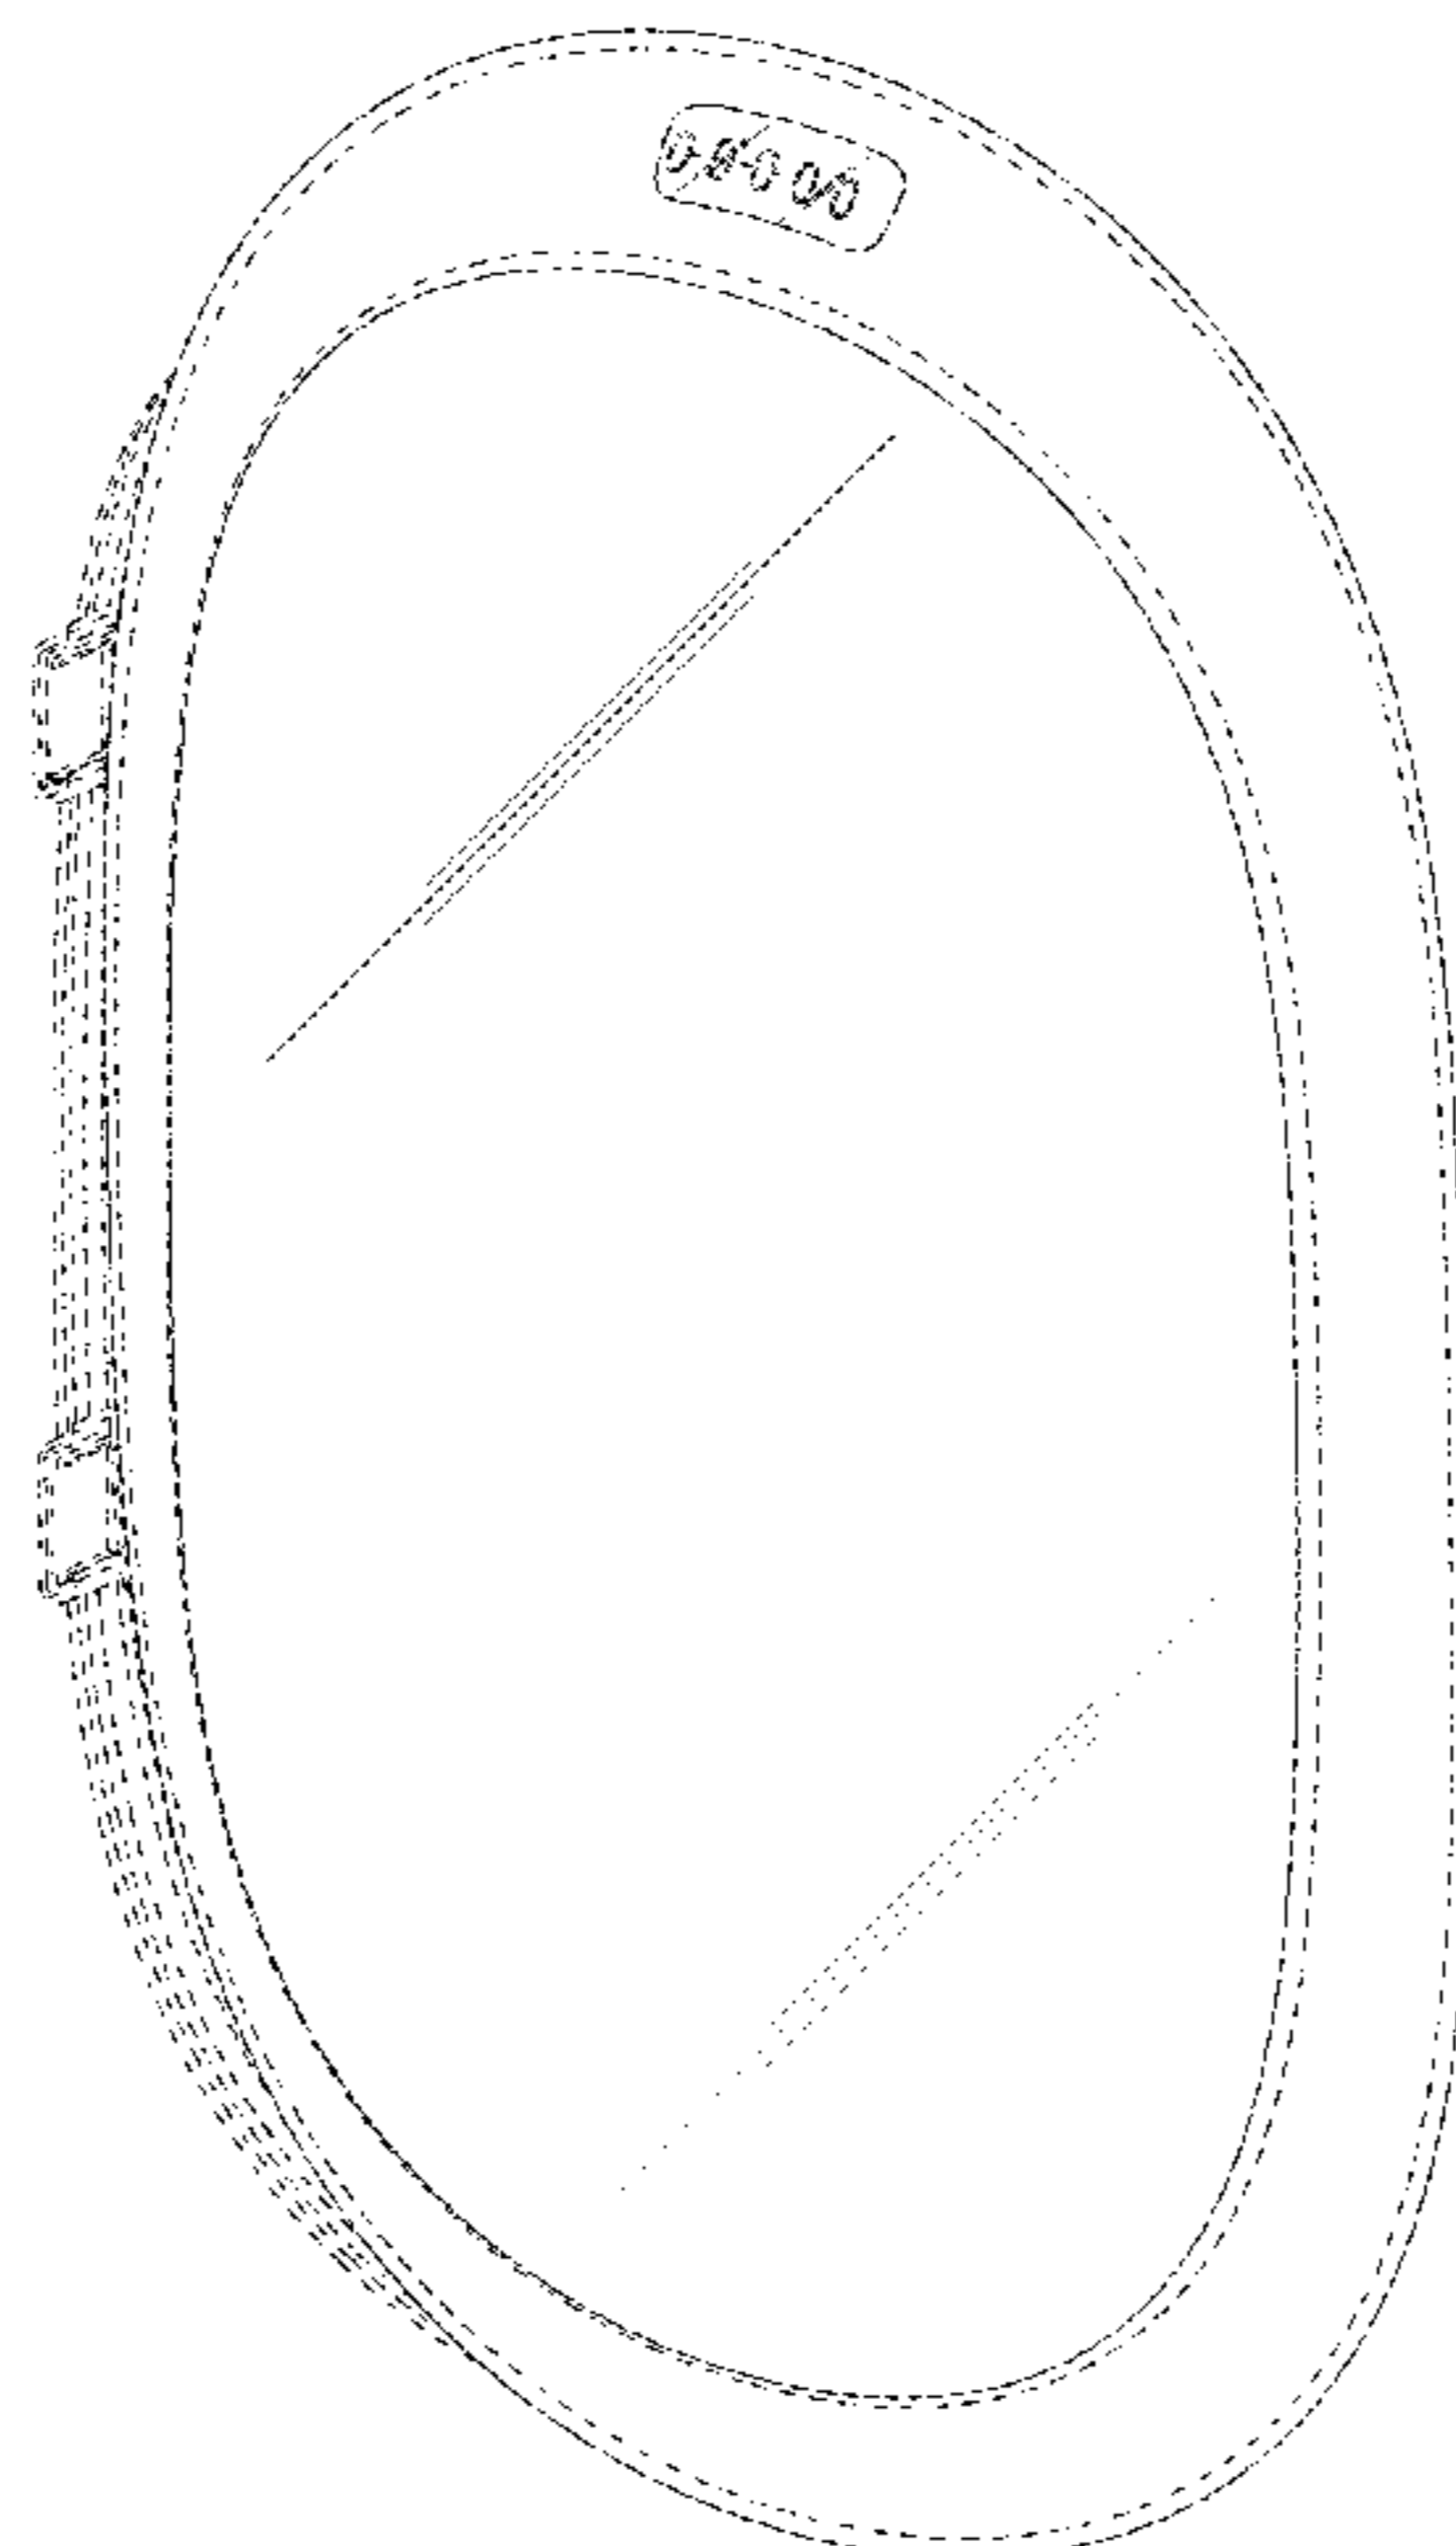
is a bottom left perspective view of a window switch assembly of the present disclosure;
